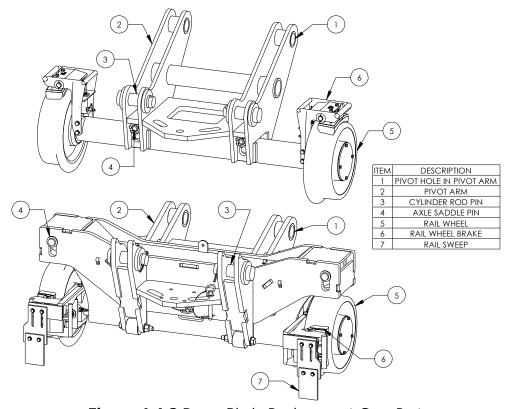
Dozer Blade Replacement Gear Parts
